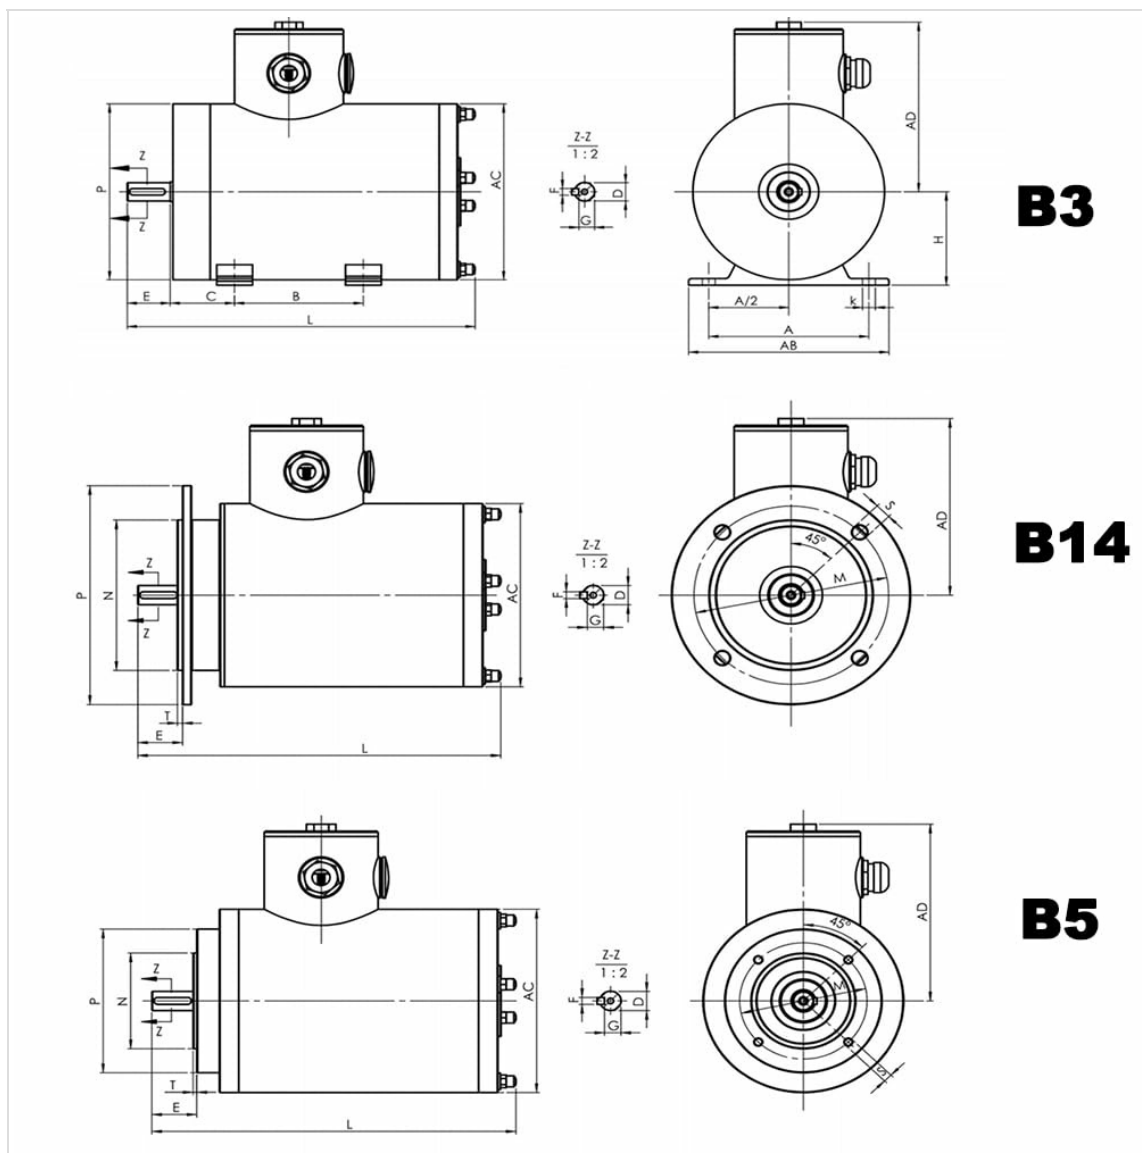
Technical drawings illustrating B3 (foot-mounted), B14 (face-mounted), and B5 (flange-mounted) configurations with dimensions.
